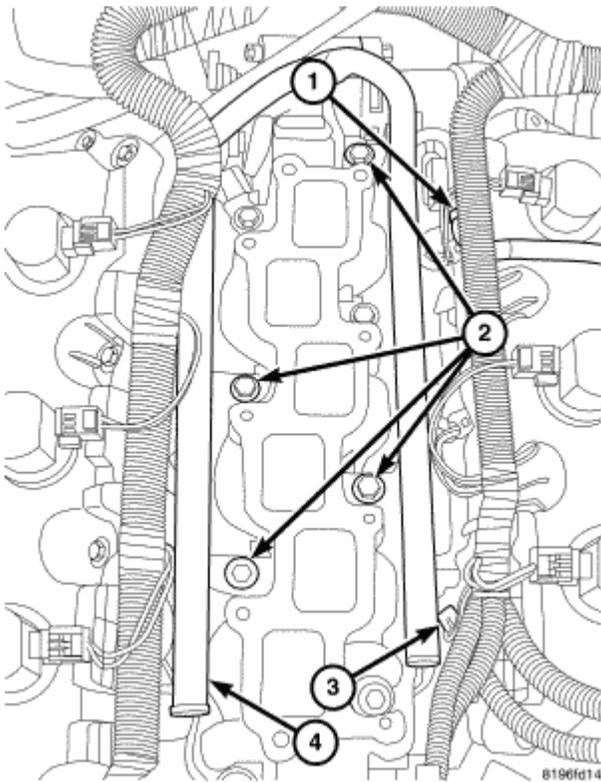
Identifying Fuel Line, Mounting Bolts, Electrical Connectors & Fuel Rail
